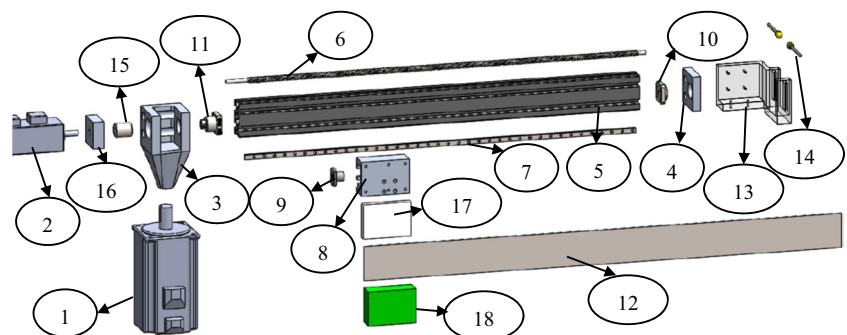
The exploded view of IUST single flexible link and R-P joint
